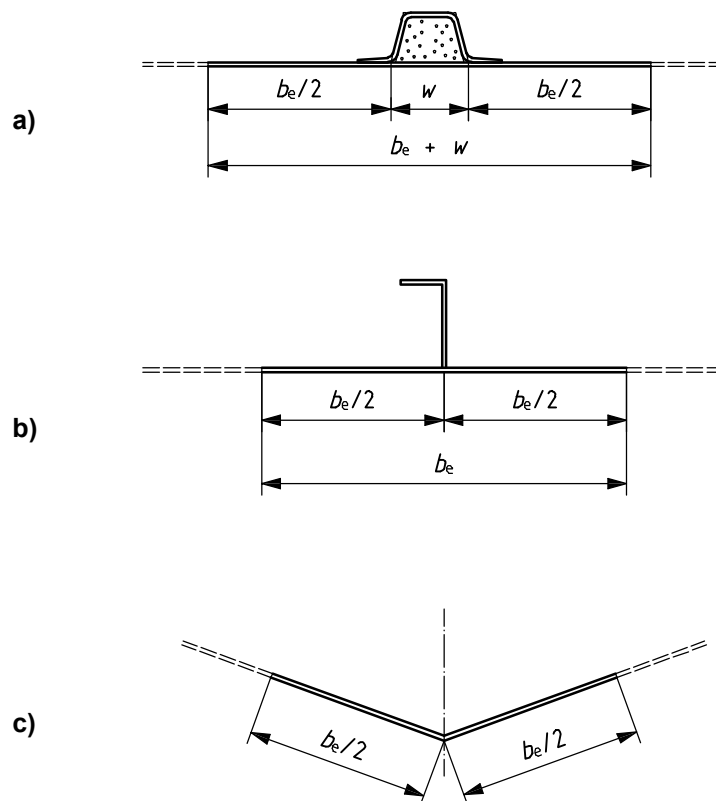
Sketch showing the effective extent of plating around a stiffener (top hat, L and chine)
